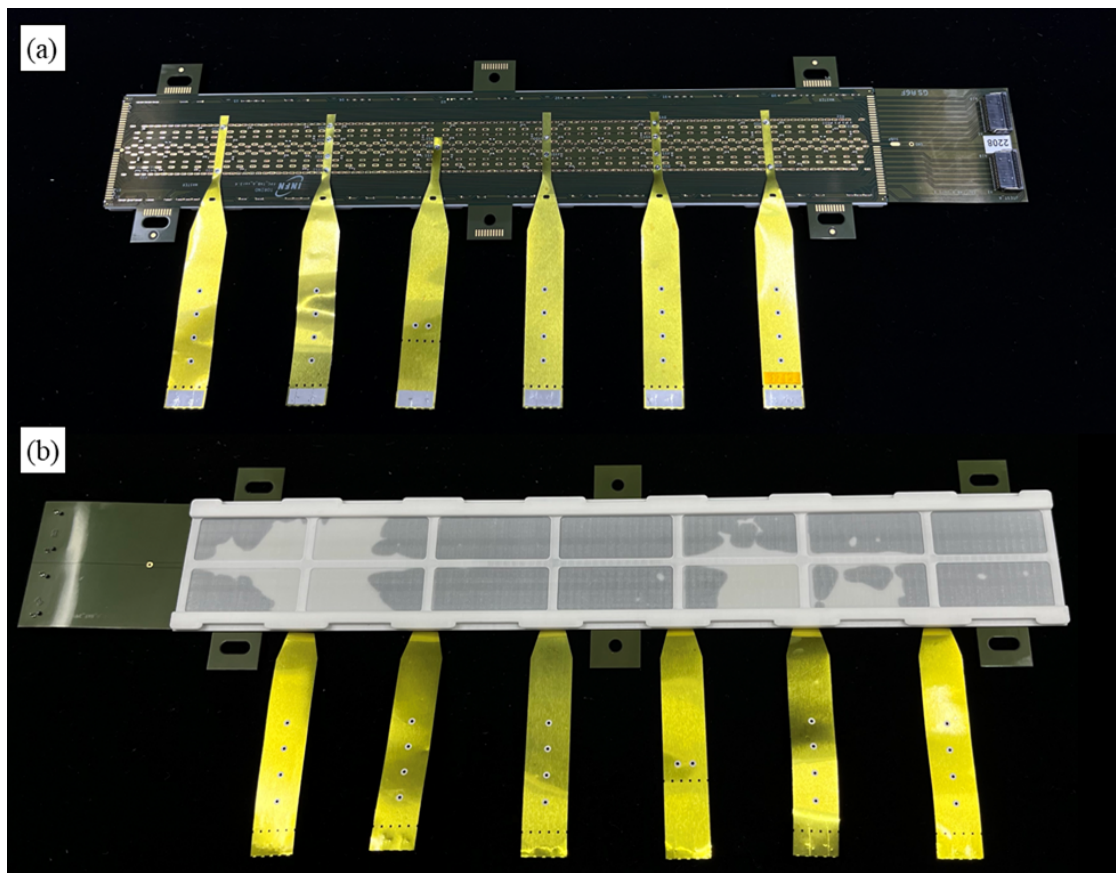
Assembled ceramic i-M μ CS. (a) Top view and (b) bottom view of the assembled alumina i-M μ CS.
